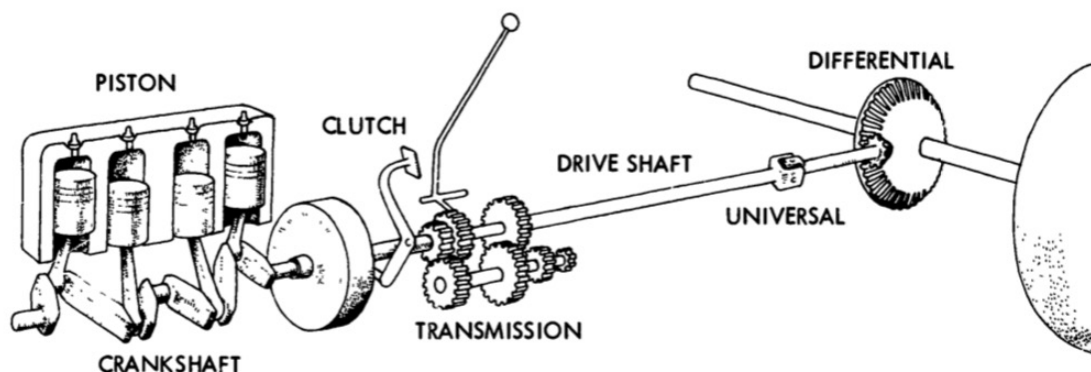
Schematic drawing of the pistons, connecting rod, crankshaft, and flywheel of a four-cylinder automobile engine .
